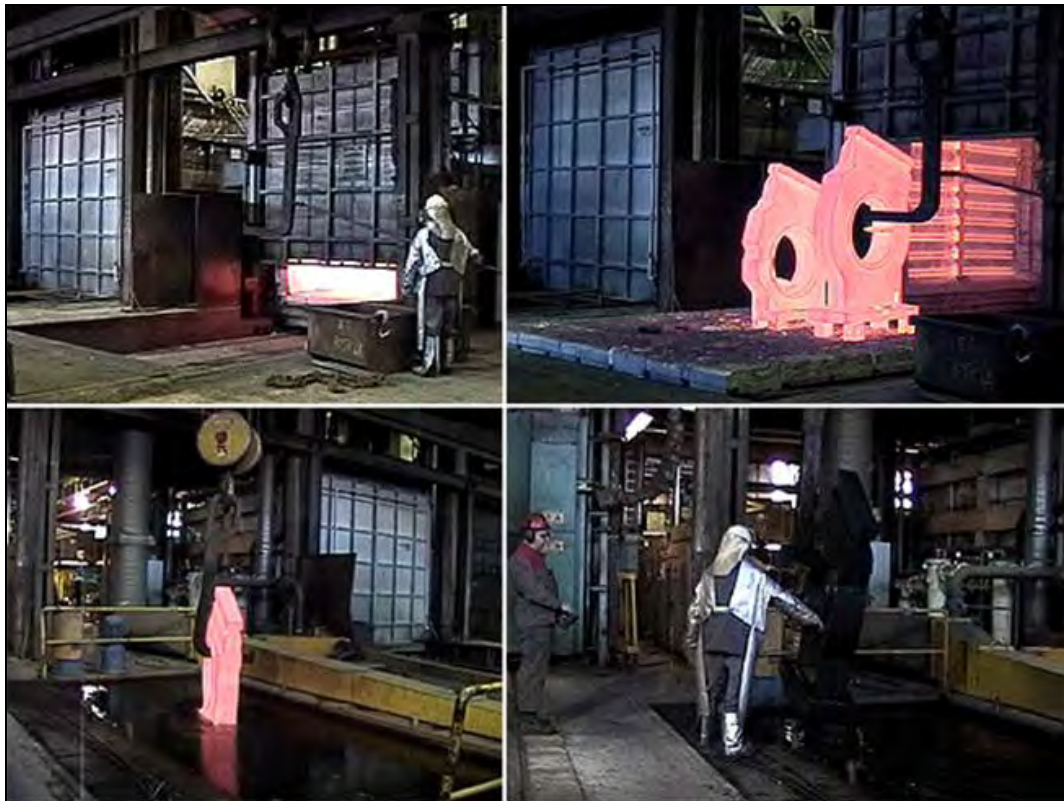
Quenching of a hot casting shortly after heat treatment [237, HUT, 2003]
